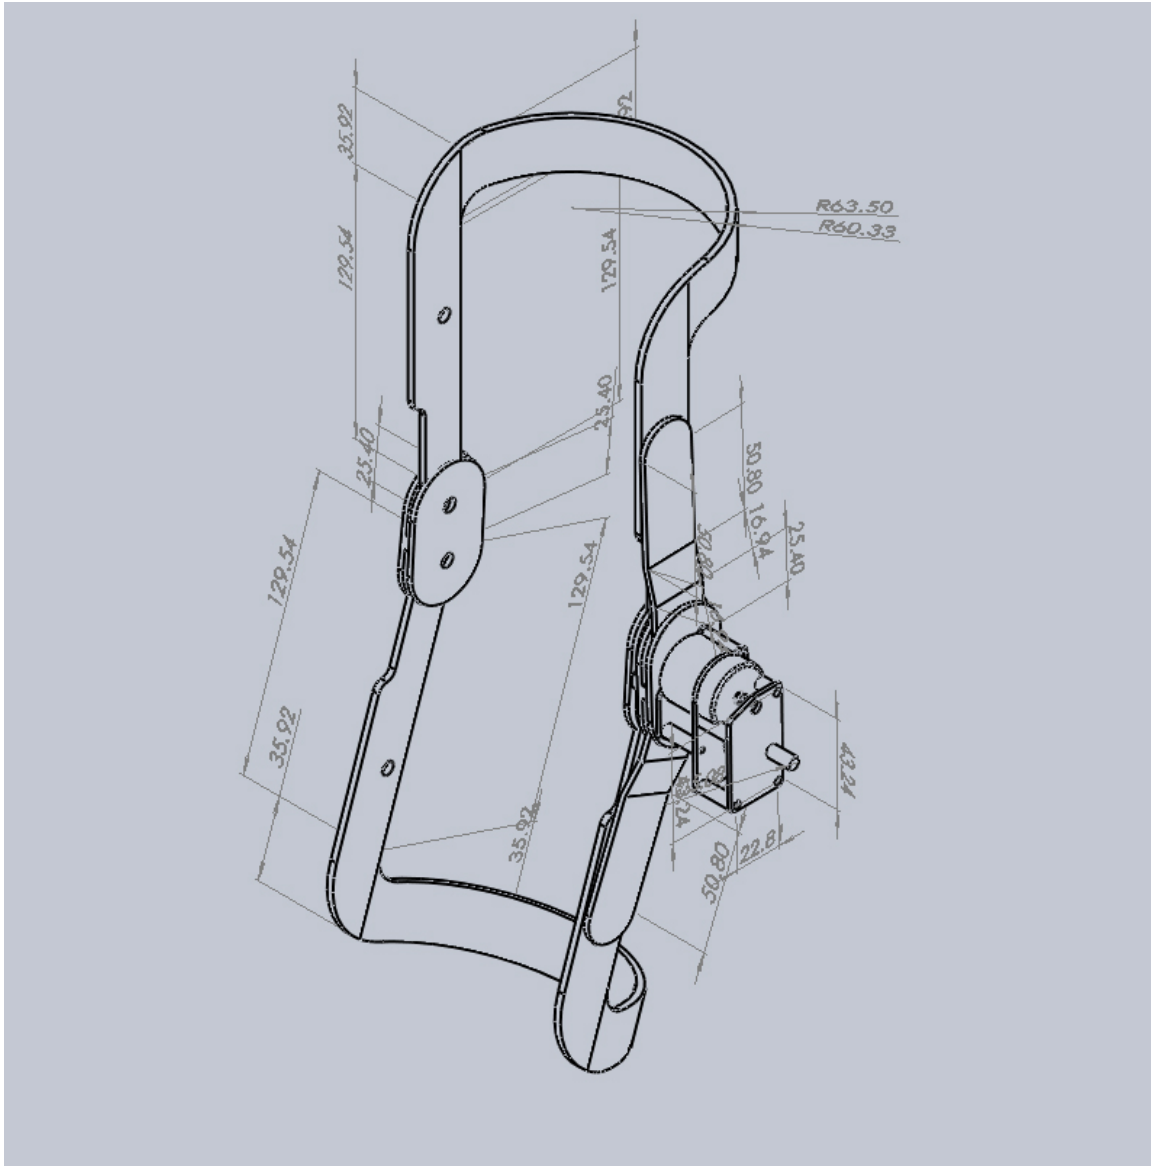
SolidWorks Solid Model 3-Dimensional View of the Knee Brace Assembly
